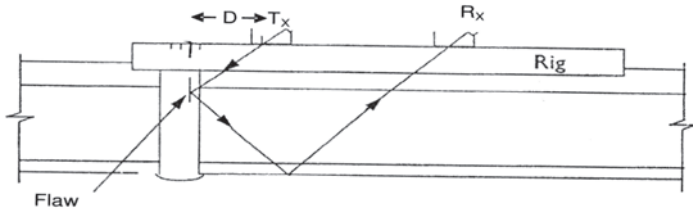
Standard A.T. Welded Rail Test Piece
